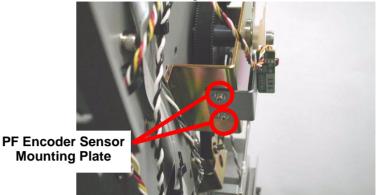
Removing the PF Encoder Sensor Mounting Plate
